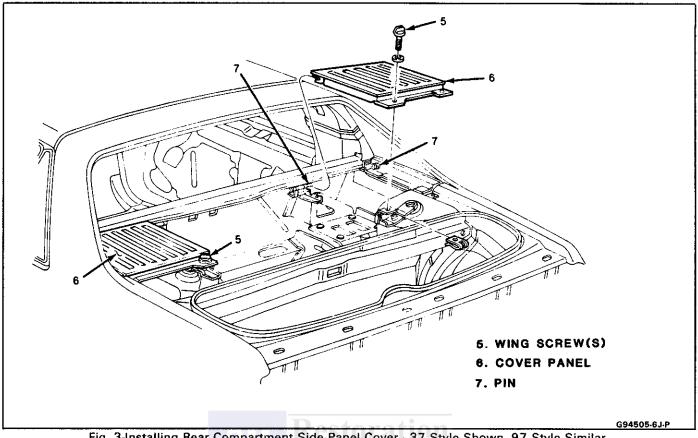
Installing Rear Compartment Side Panel Cover - 37 Style Shown, 97 Style Similar
